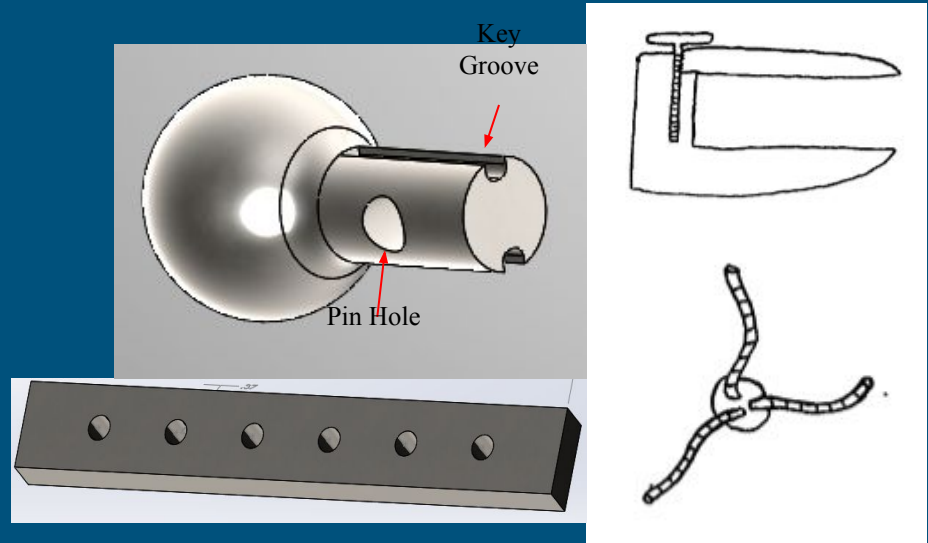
Complete head attachment assembly with bolt pattern and schematic of crescent wrench clamp and flexible finger head
